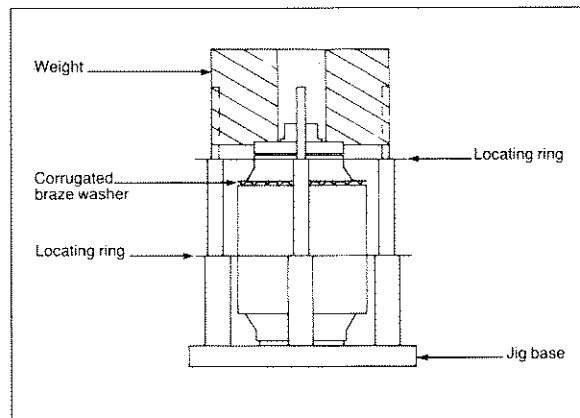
Brazing jig with assembled ceramic envelope vacuum switch in position.
